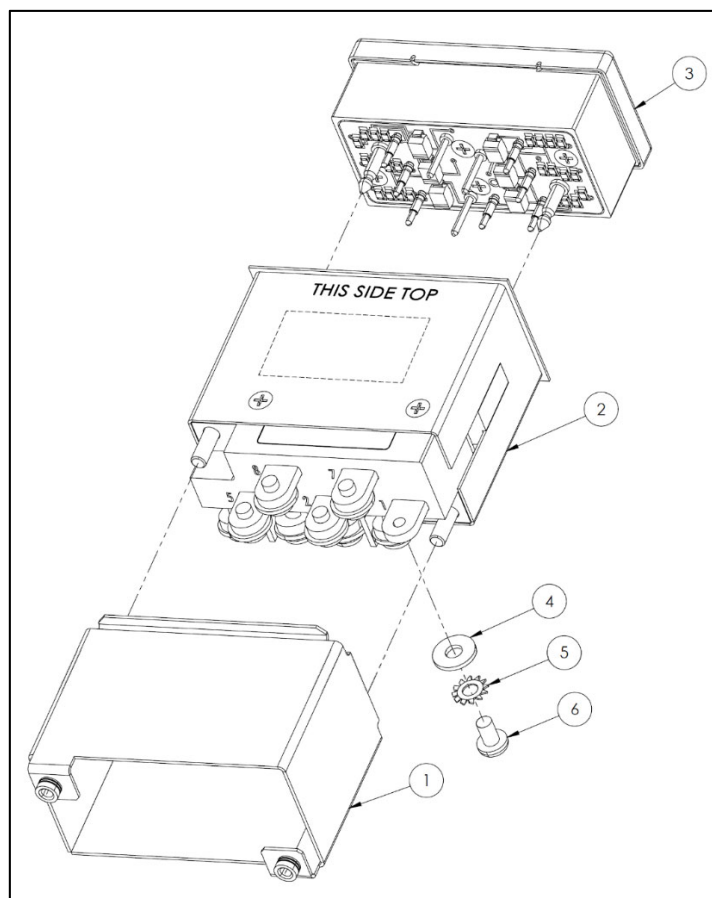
Exploded view of FSCC P/N 65-0294-21FS
